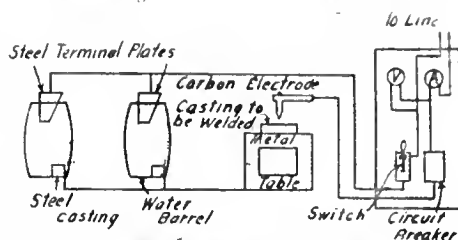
ARRANGEMENT OF APPARATUS FOR ARC WELDING.
